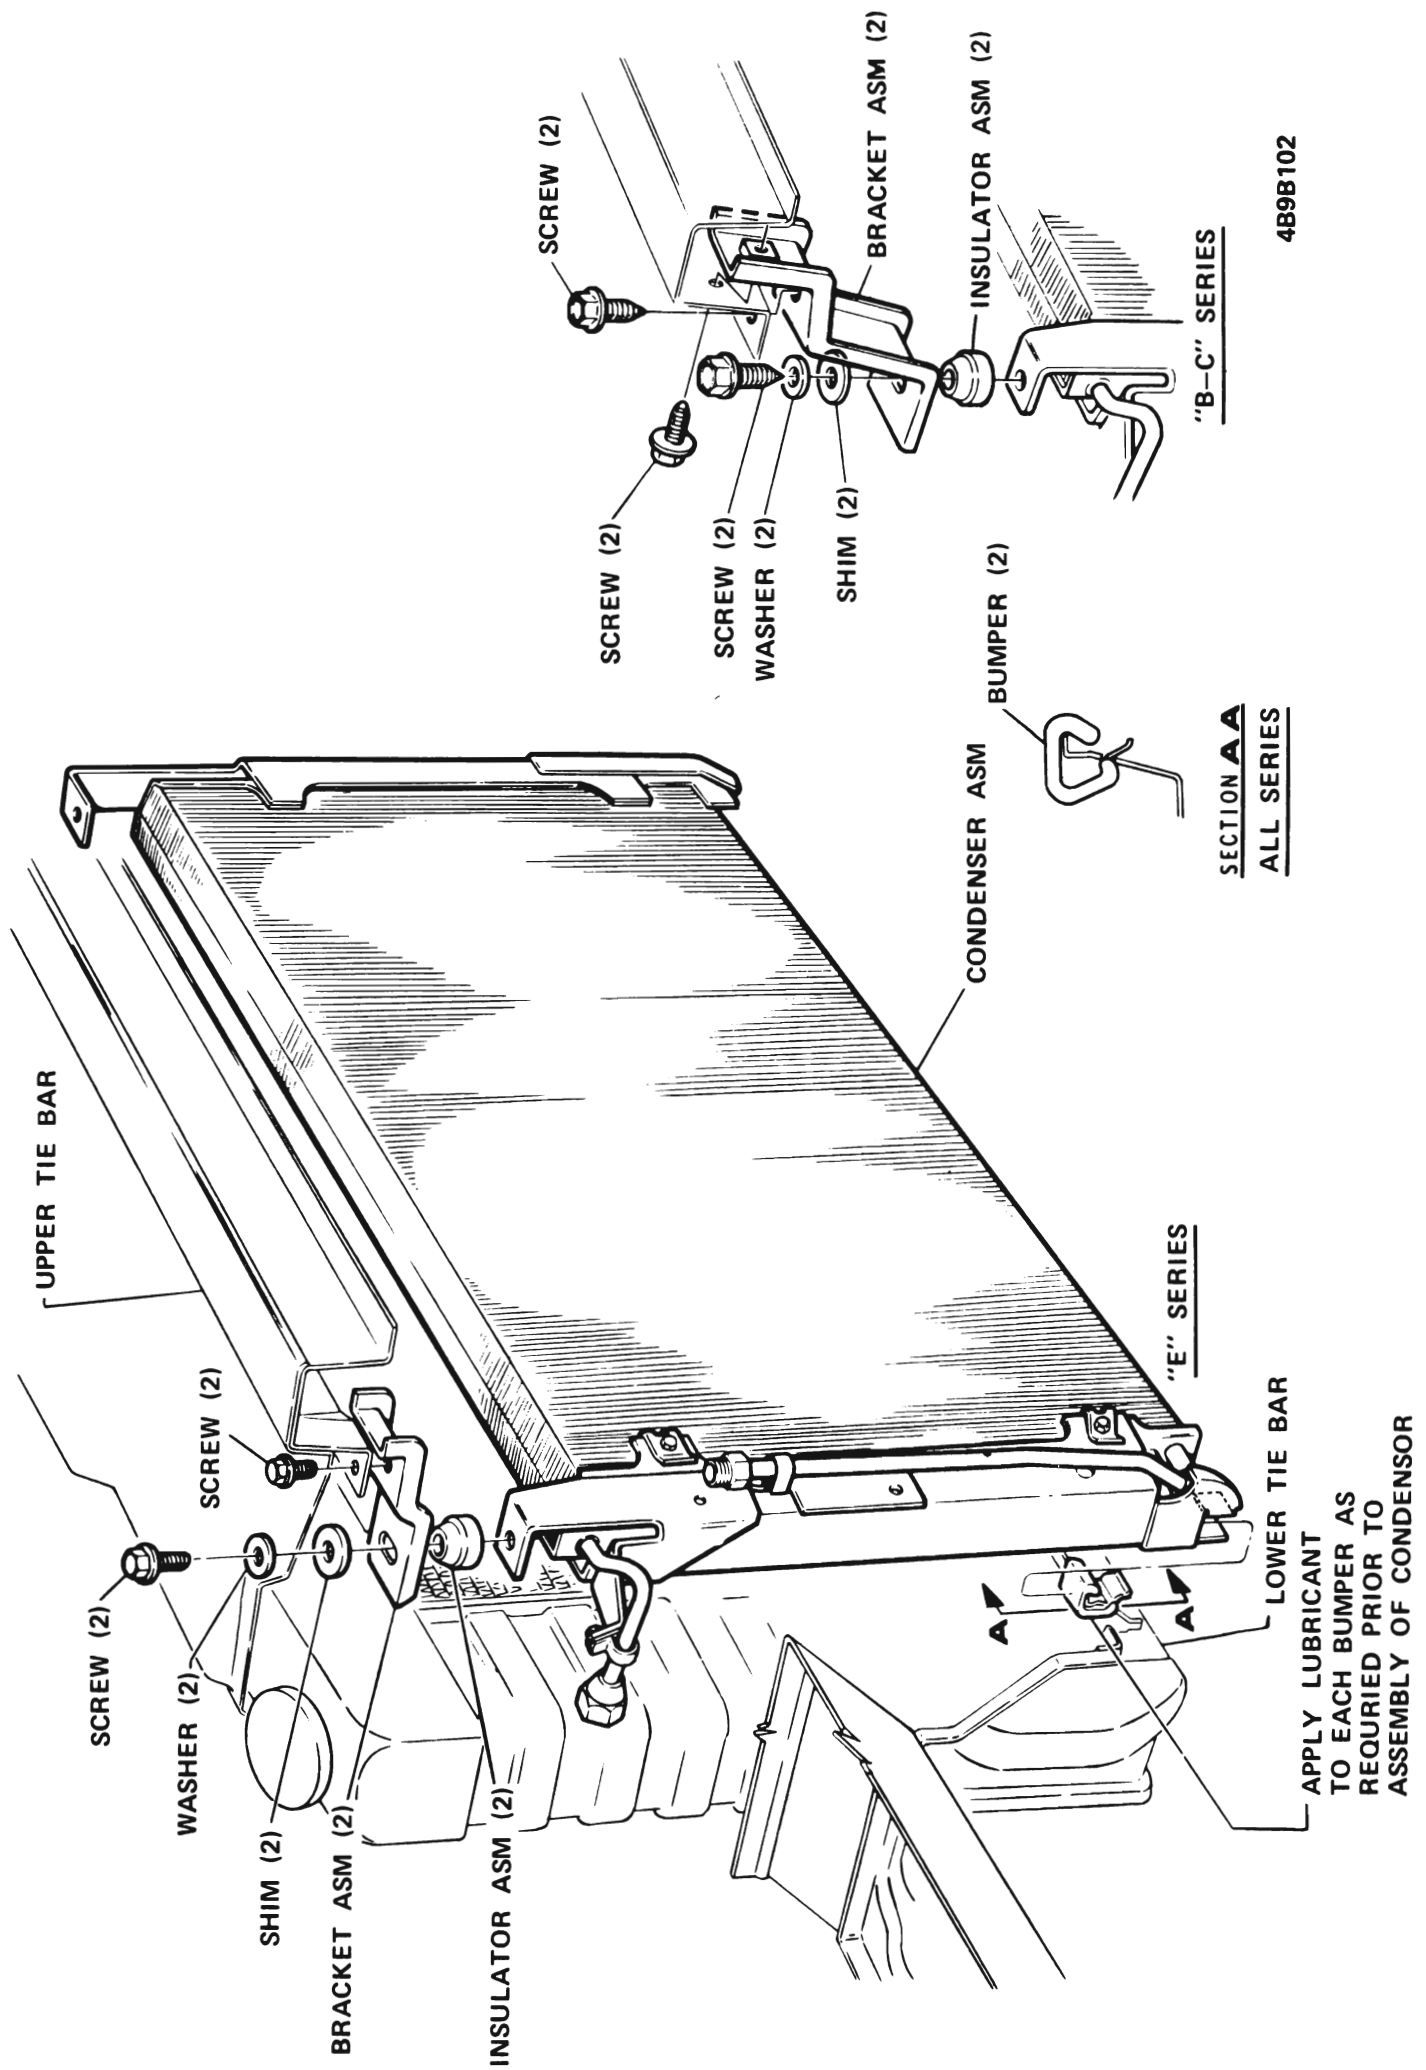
B-125 Condenser Assembly Mounting - B-C-E Series
